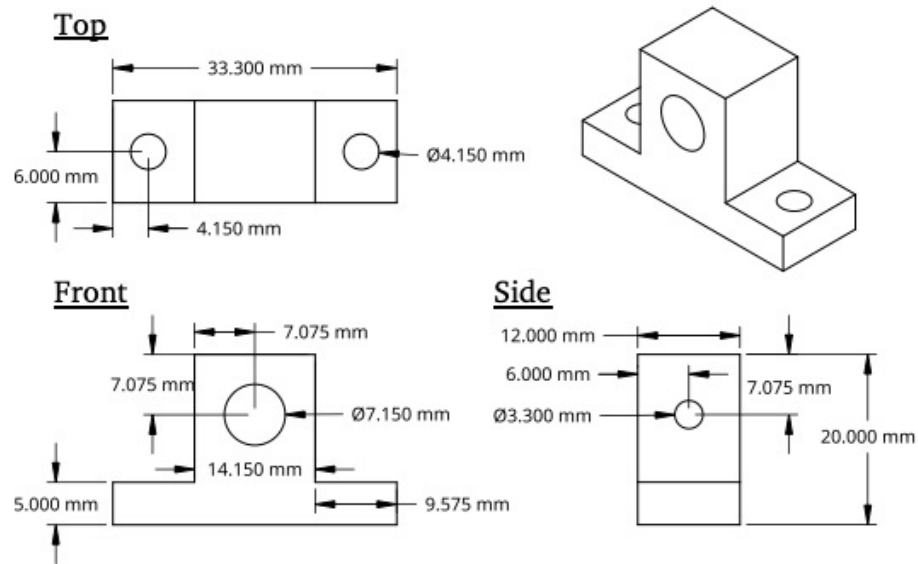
This drawing shows the 3D printed piece for mounting the micro-needle holder. Two of these pieces were printed and screwed into the translation stage. The micro-needle was mounted into the holder, and the holder was slid into the large hole on the front, and fixed in place with set screws. Scale 2:1.
